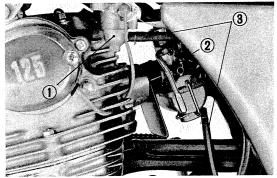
① Fuel cock ② Carburetor ③ Fuel pipe
